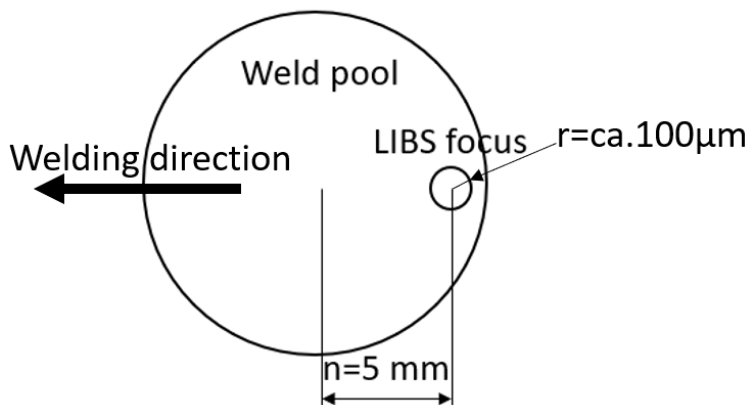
Schematic of the top view of the weld pool and LIBS focus point.
